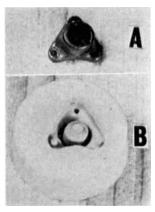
Key: A, completed brass pattern; B, completed silicone rubber mold for preparing epoxy resin electrode mounts.
